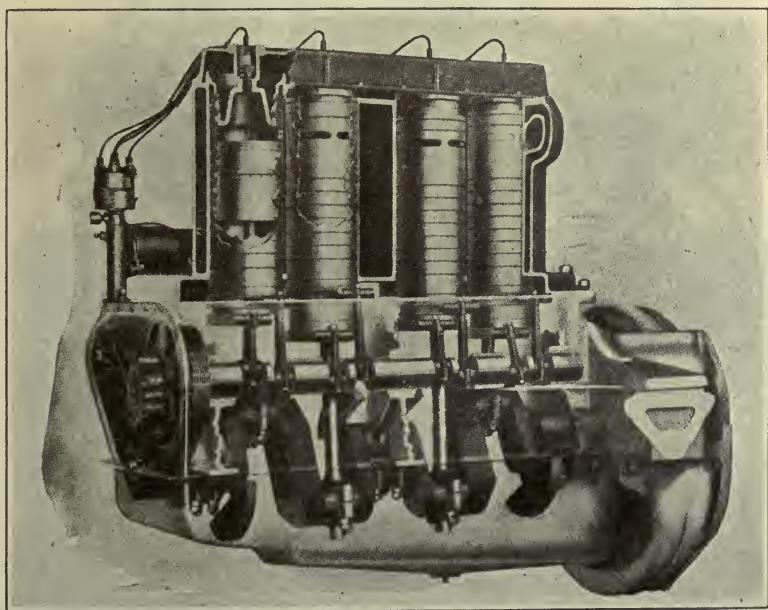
Phantom photo of typical Stearns Knight motor, showing sleeve-valves and their operating mechanism.
